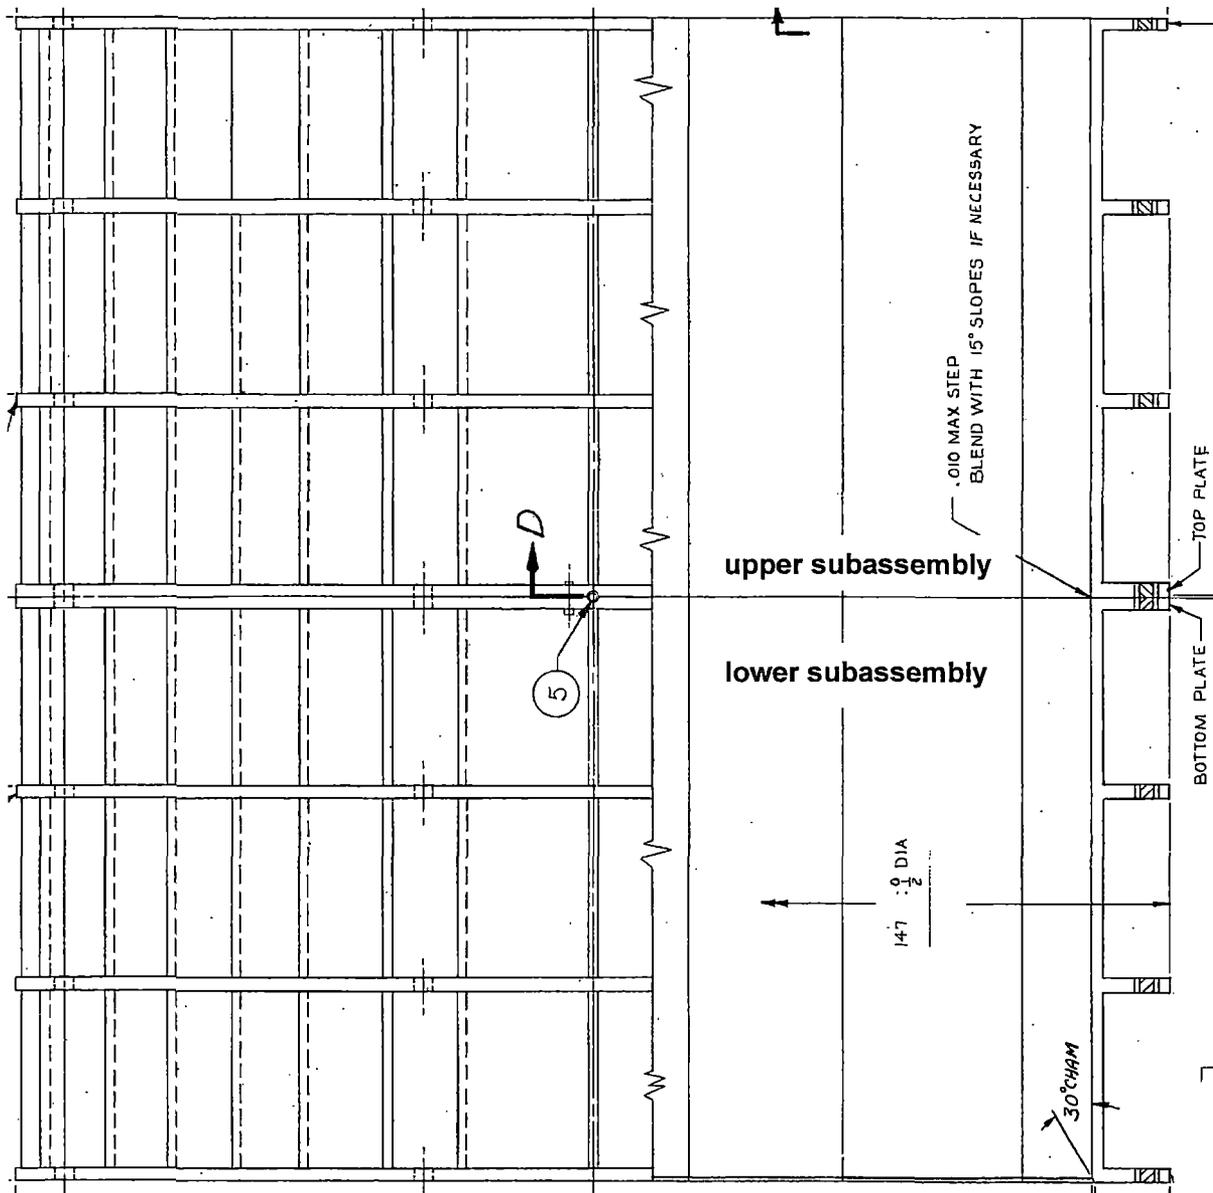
SL1 Core Shroud Assembly – Elevation View
